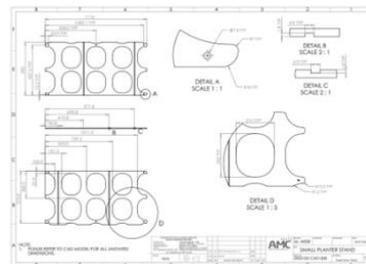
Drawing - 0022-DE-CAD-008 - SMALL PLANTER STAND
